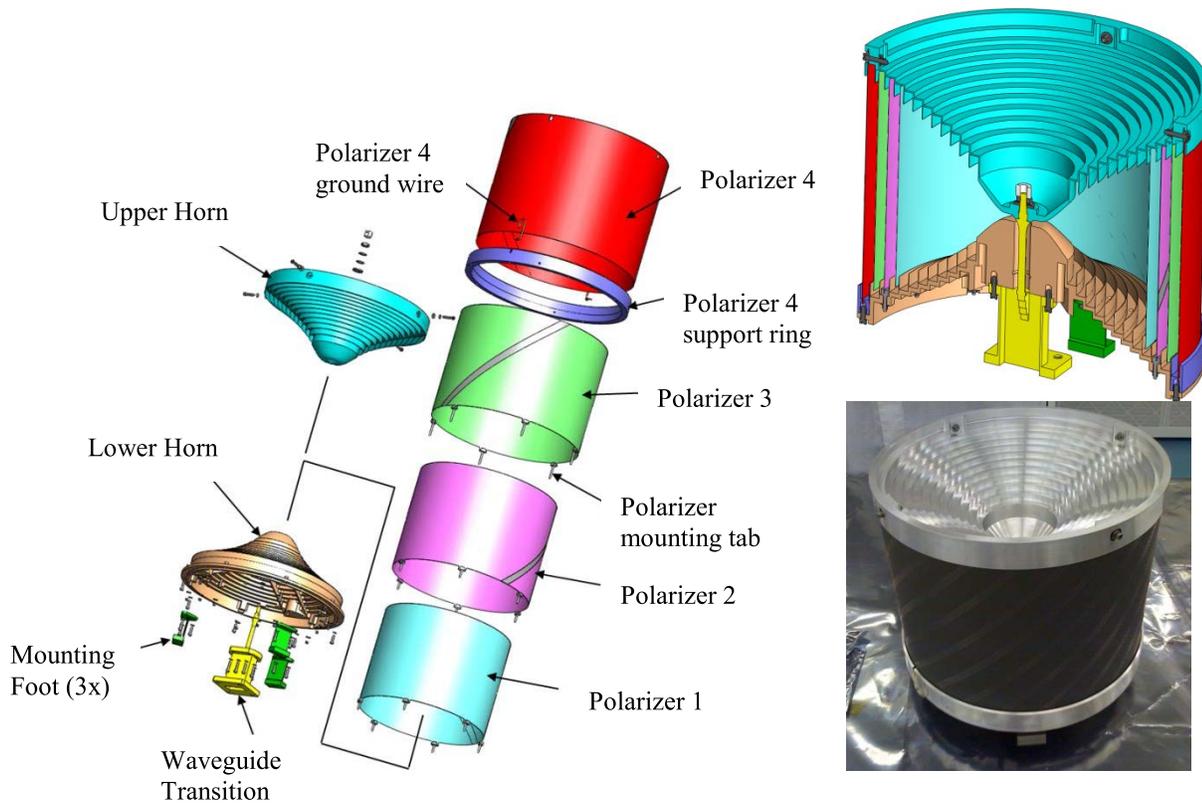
Toroidal Low Gain Antenna Assembly; exploded view (left), cross section view (upper right), and Juno Flight unit without outer blanket (lower right)
